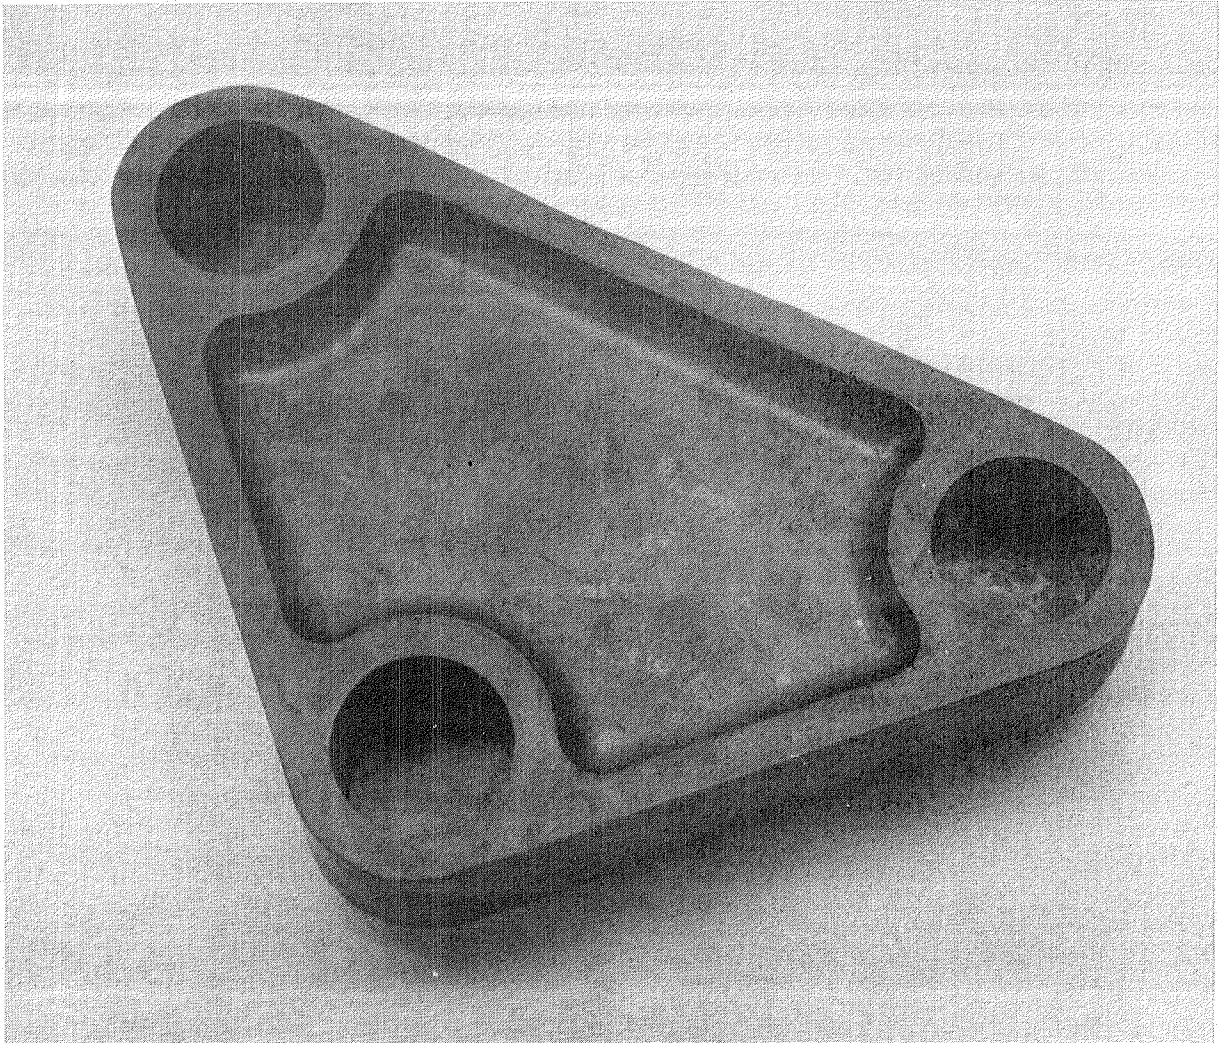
Complex Shaped Process Demonstration Part Showing Good Compound Flow and Mold Conformance—Imidized at 191°C (375°F), Removed From Mold Cold
